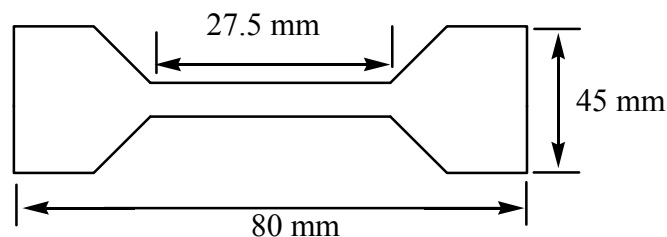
Dumbbell shape sample dimensions for tensile testing
